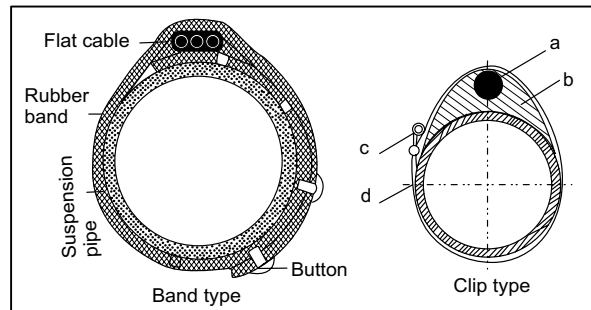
Types of cable clamps for attaching the power cable to column pipes of submersible pumps
